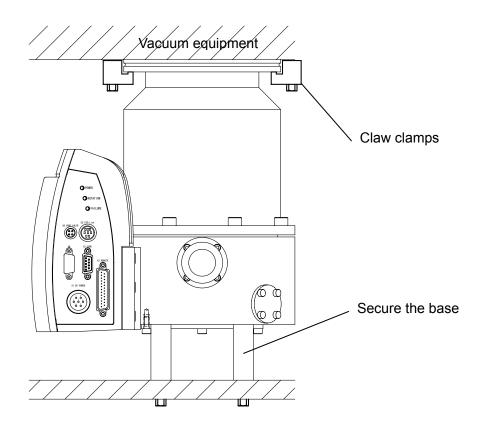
Example of Securing the STP Pump (When securing the inlet port flange with claw clamps)
